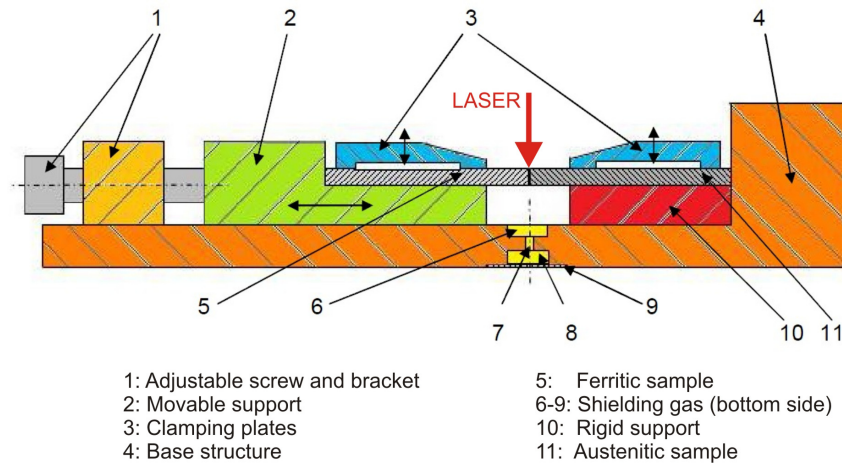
Clamping device for the experimental welding trials [Bavarian Laser Centre].
